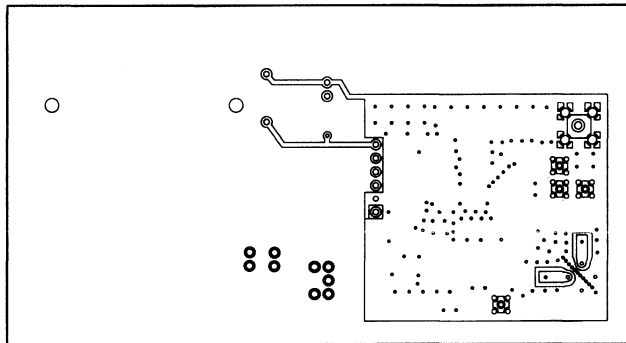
TRF1400 Test Circuit Board Layout — Bottom Side
